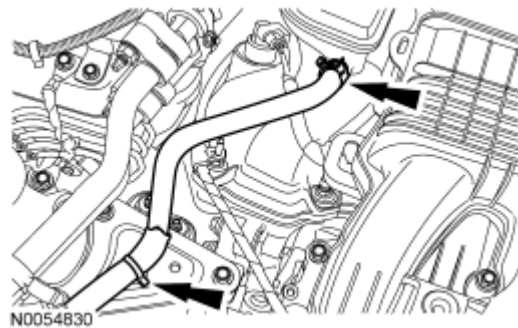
Identifying Pin-Type Retainer From Engine Mount Brace
